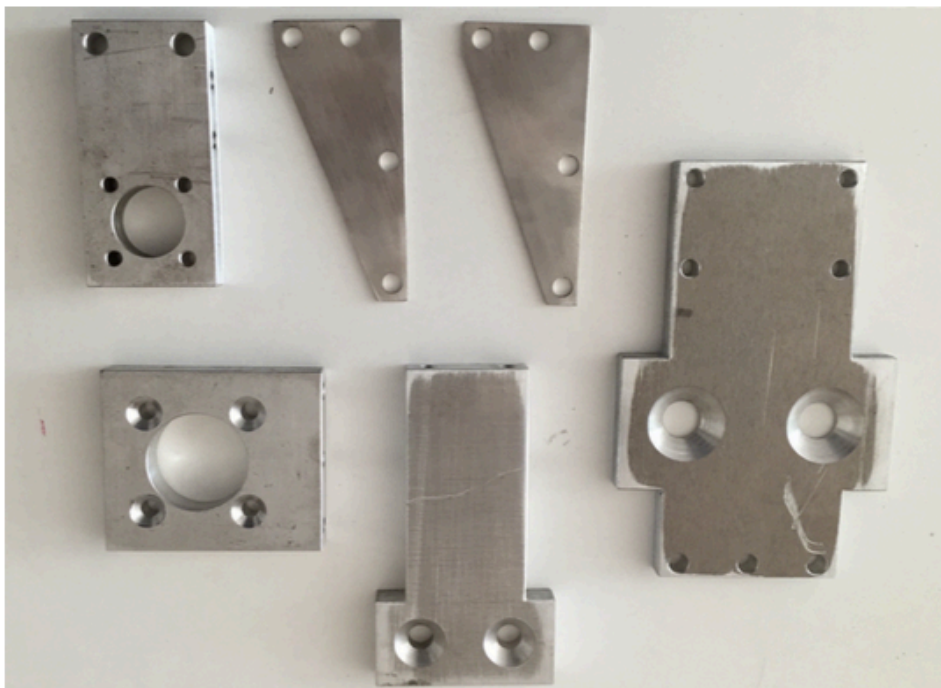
Mechanical parts for *joint 3*, A. A. 6082 and Stainless Steel 304.
